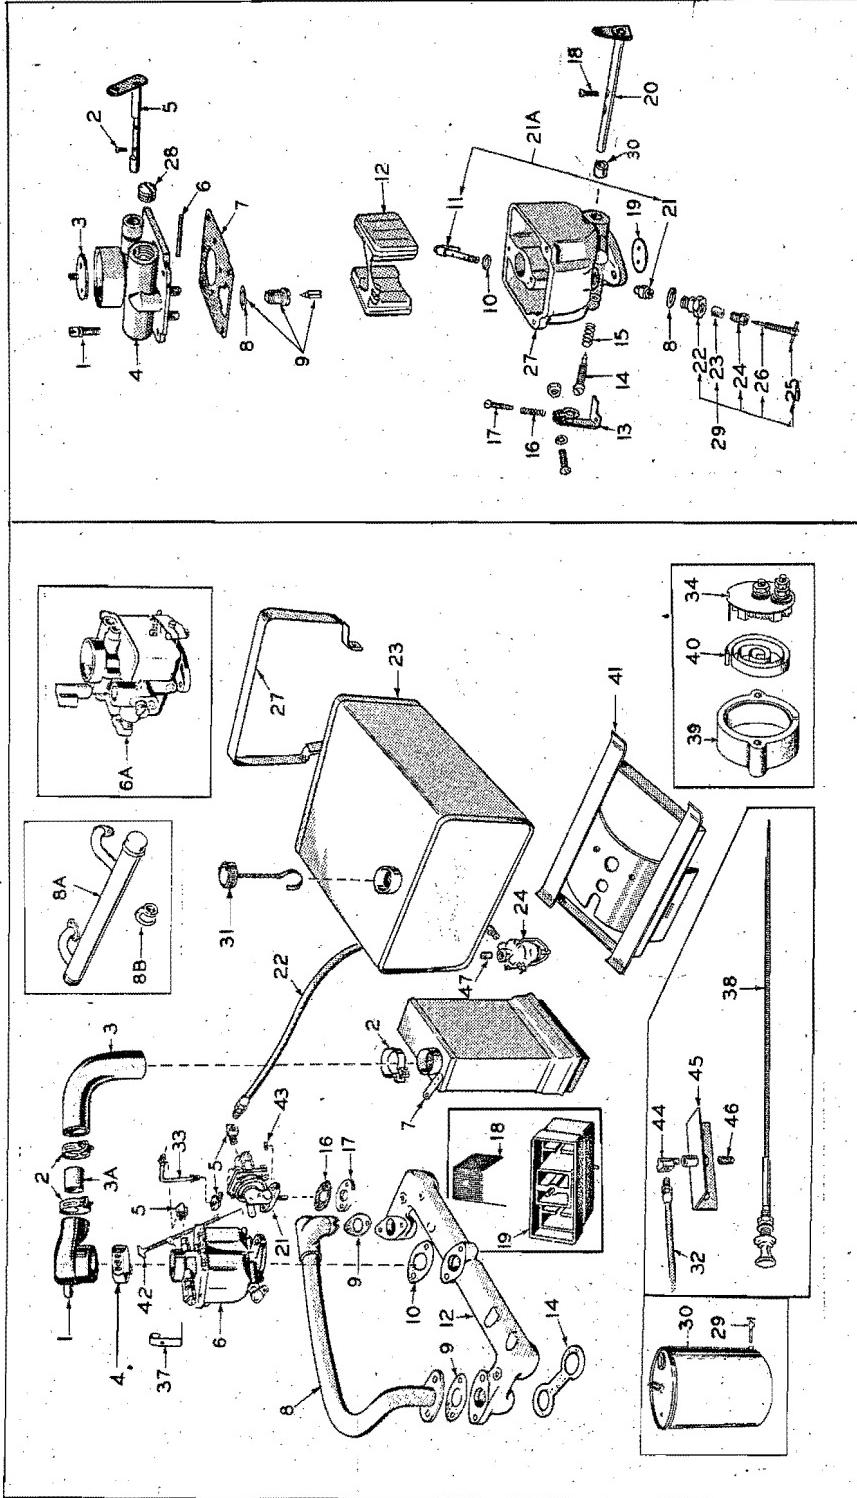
FIG. F - FUEL SYSTEM GROUP FIG. G - CARBURETOR PARTS GROUP
